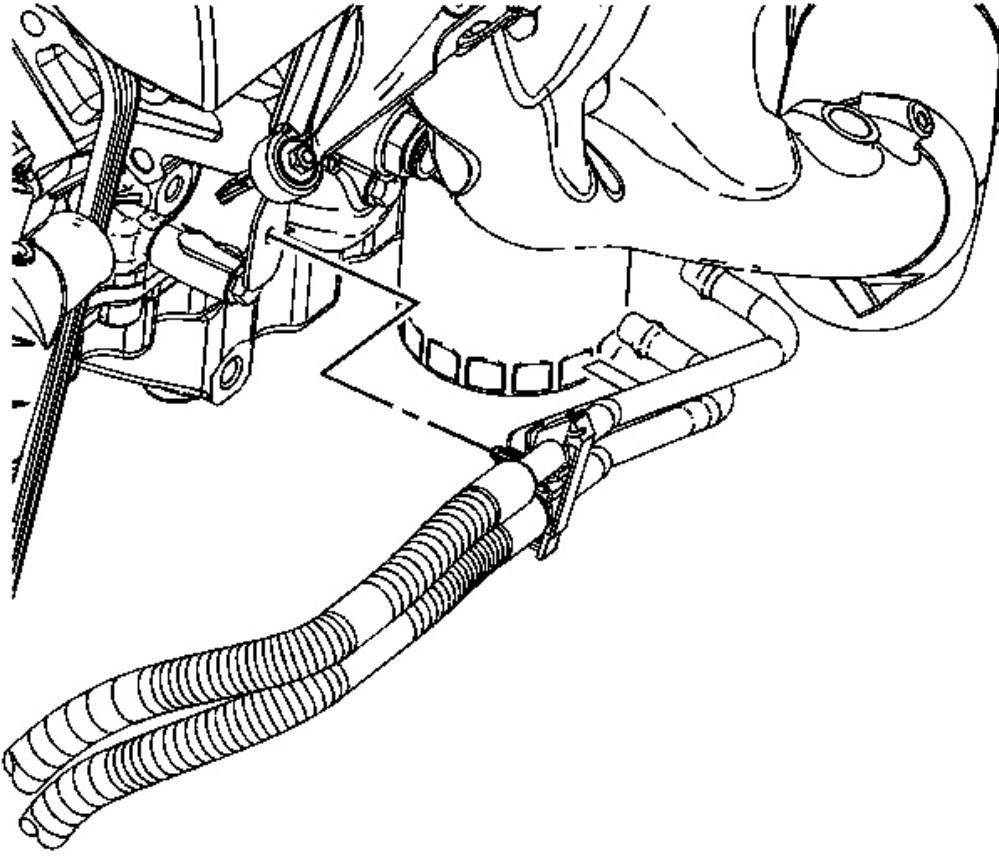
View Of External Engine Oil Cooler Hose/Pipe
